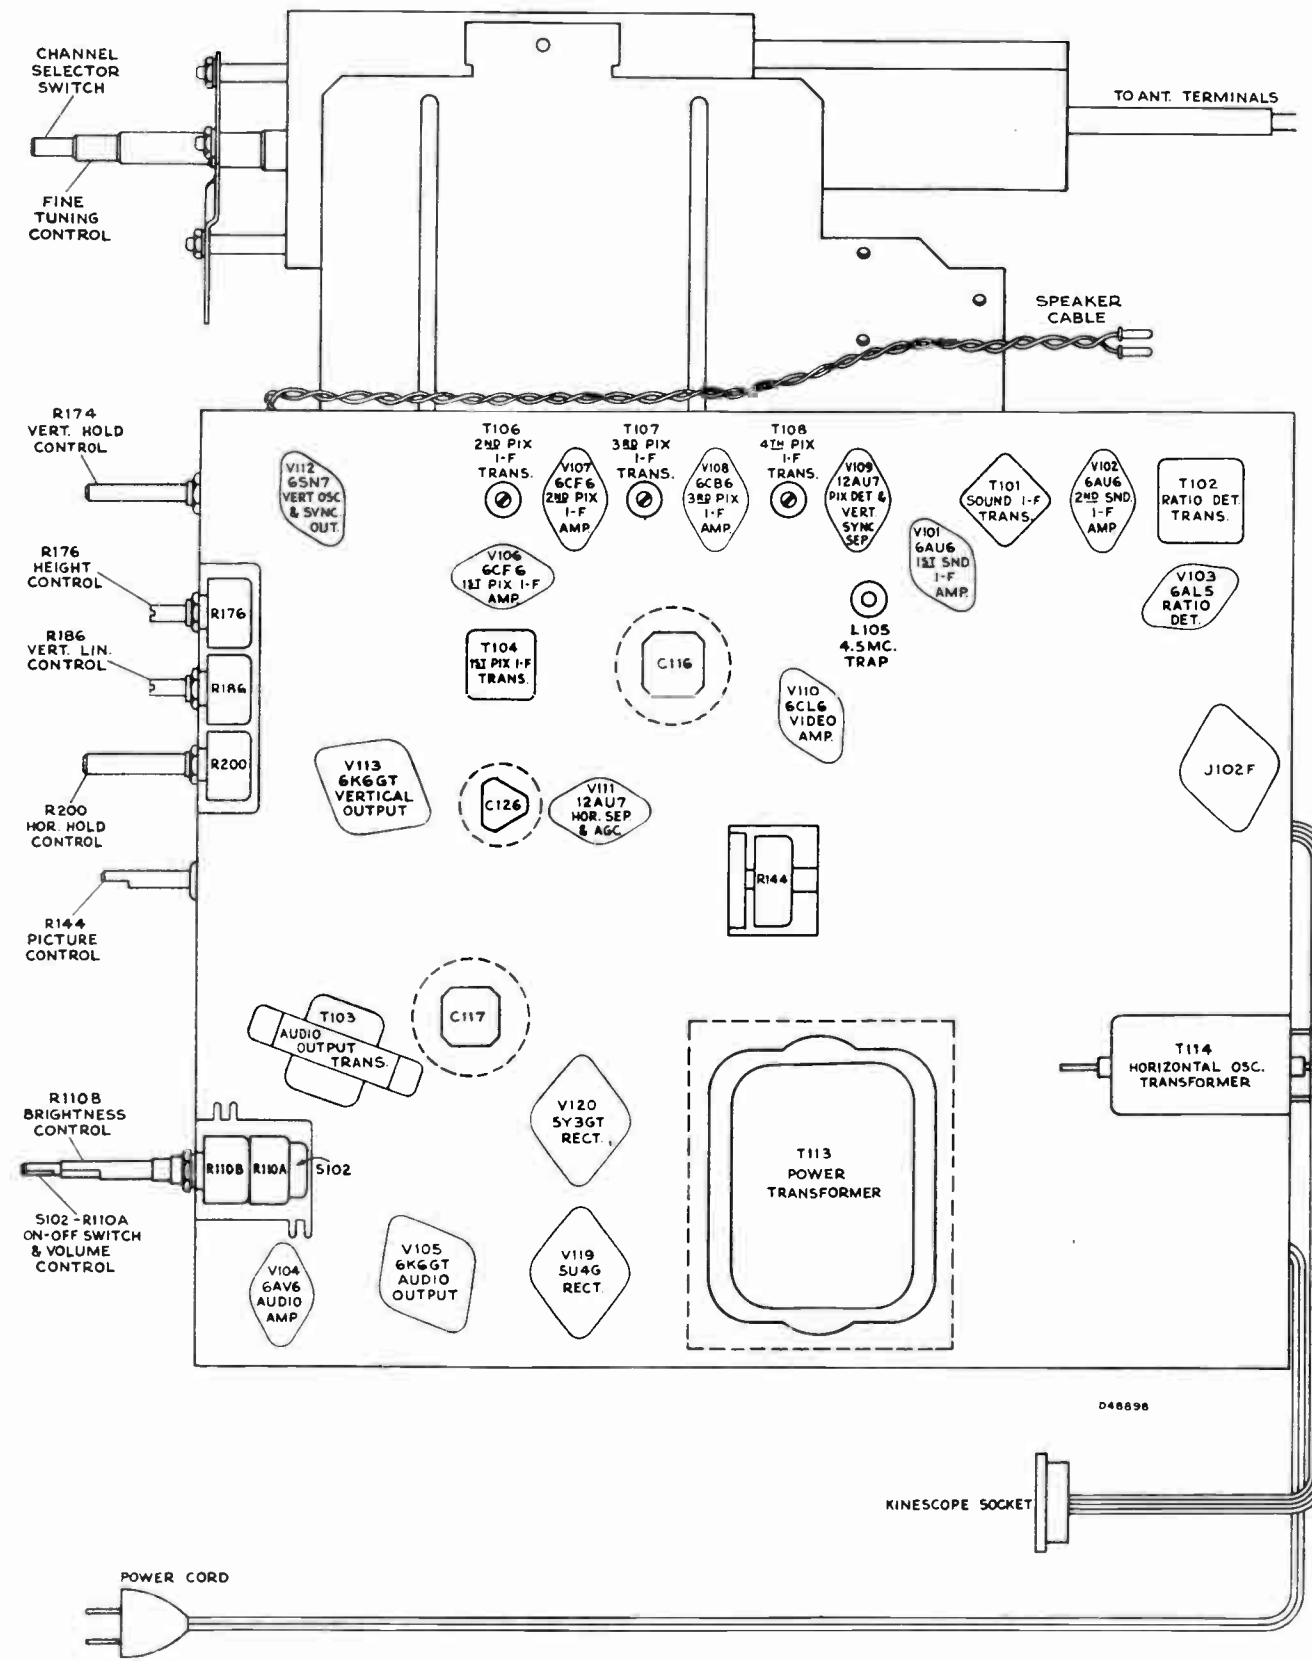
Chassis Bottom View (shown with KRK29 Tuner)
